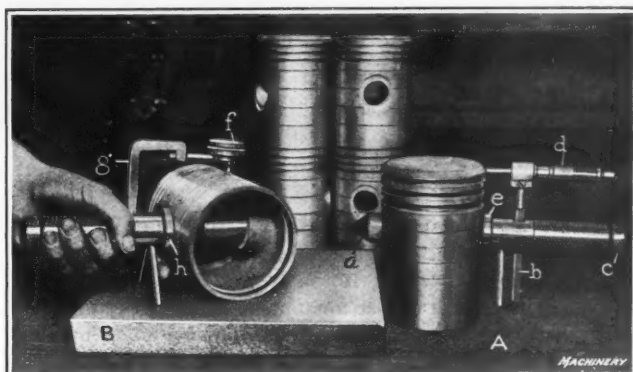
Indicating Gages for testing Squareness and Concentricity of Piston-pin Hole in Relation to External Diameter of Piston
